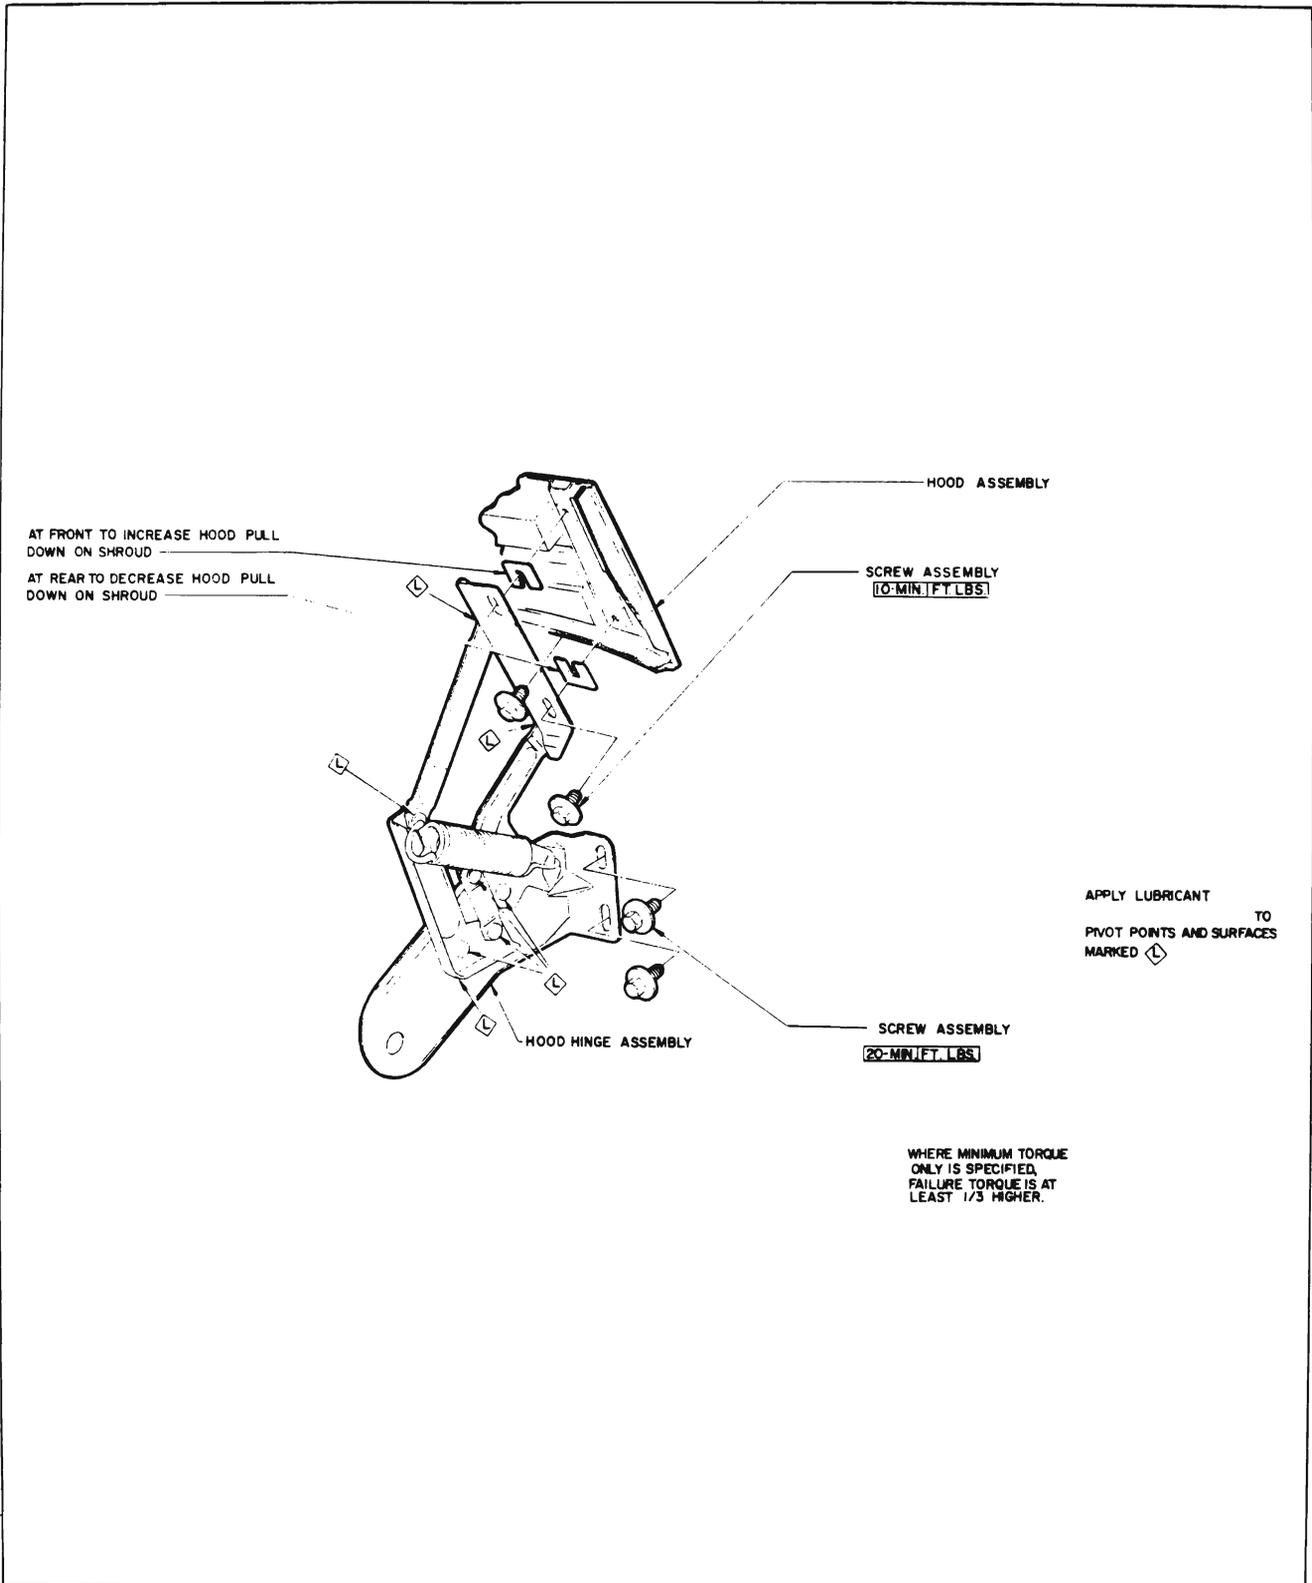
Hood & Hood Hinge Assembly—4400-4600-4800 Series
